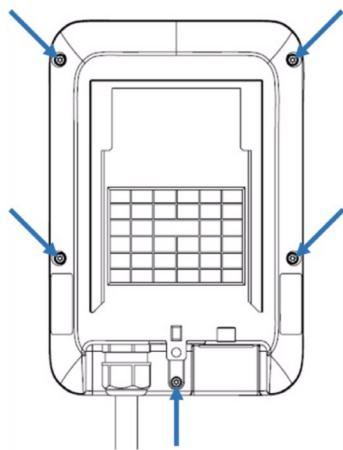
Five Torx screw locations to remove the charging station front cover
